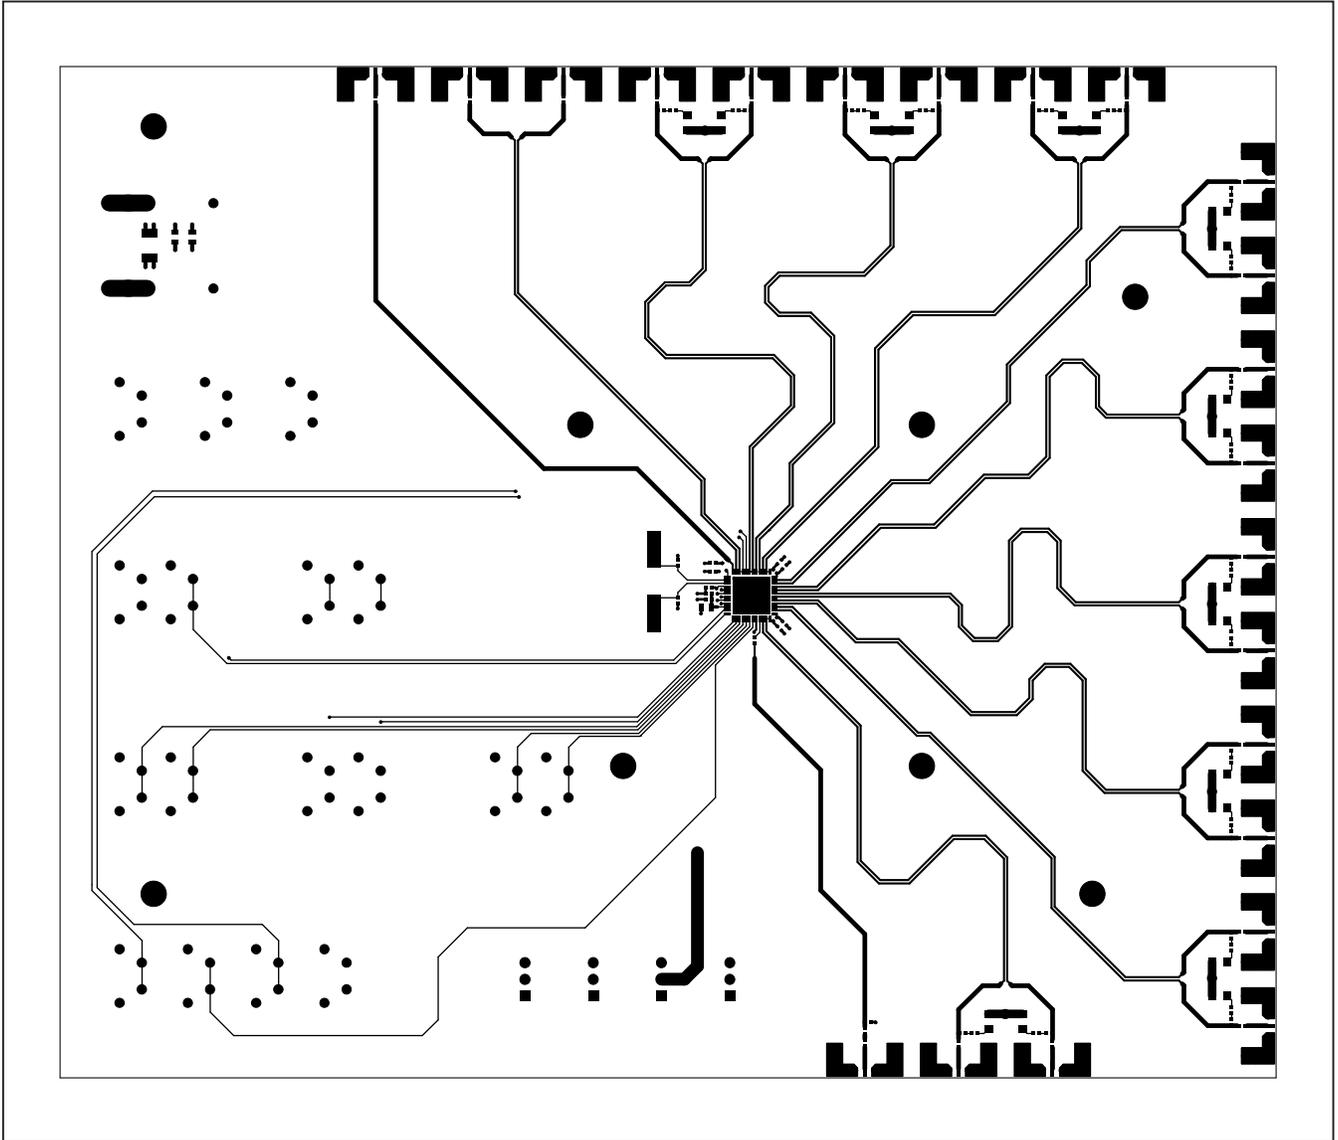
MAX3639 EV Kit PCB Layout—Component Side
